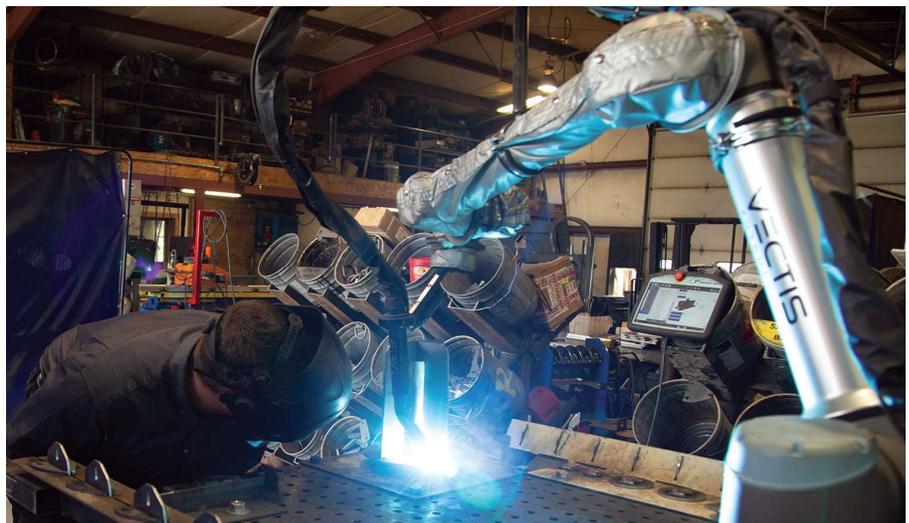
"You can work right beside the cobot as it is moving and welding," said Travis Jordan, owner and president, MT Solar.
